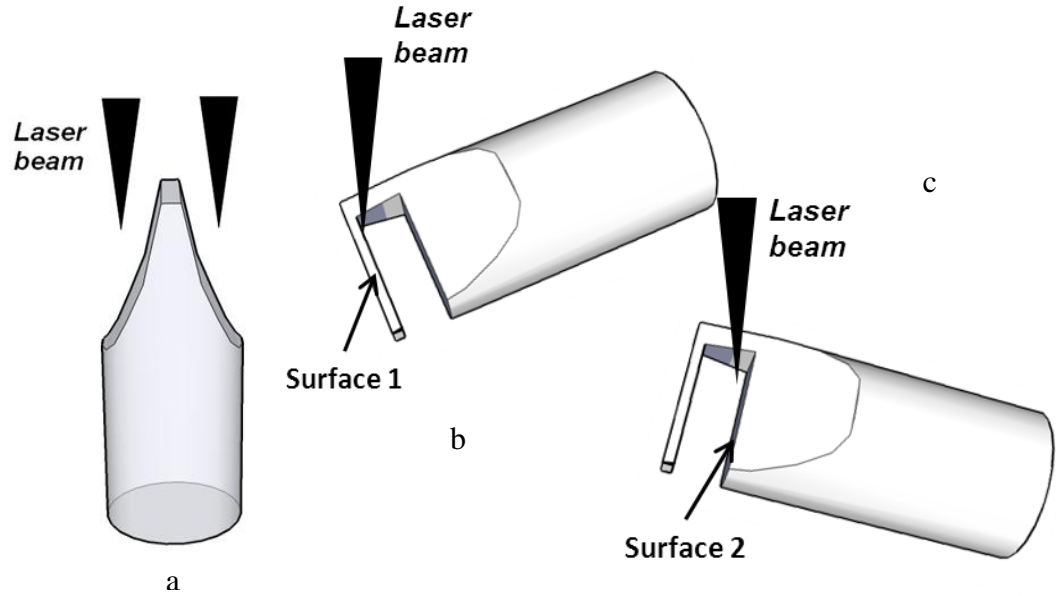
General manufacturing steps for optical fibre-top cantilever: (a) Laser machining to form a ridge, (b) Laser micro-machining of surface 1, (c) Laser micro-machining of surface 2.
